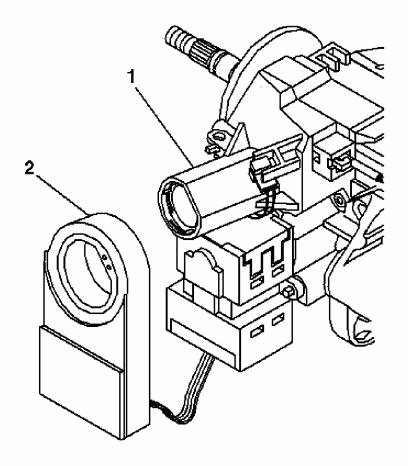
Locating Theft Deterrent Module & Ignition Lock Cylinder Case Assembly
